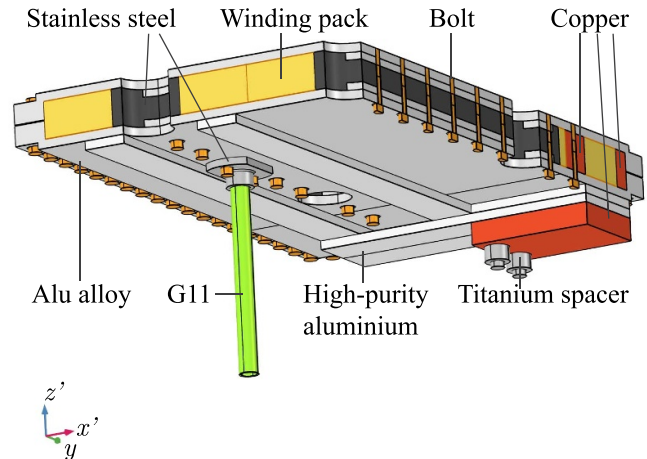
Simulation geometry, consisting of a quarter of the cold mass. Coils and stainless steel yoke are enclosed by two aluminium alloy parts, connected by steel bolts. Also shown are copper crescents and end-pieces. Copper is chosen for these parts due to its high thermal conductivity and because its thermal contraction is close to that of the winding pack. Underneath the cassette pure aluminium heat drain bars are present, as well as a copper block representing the link between the cryocooler and the cold mass. This block is pressed to the bars by using a combination of steel bolts and titanium spacers. A vertical G11 pillar is connected to the bottom cassette part via a stainless steel fixture.
